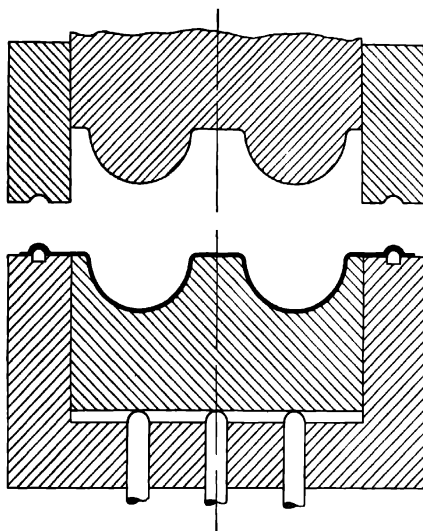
One method by which motor-car wings are drawn—showing beading.
